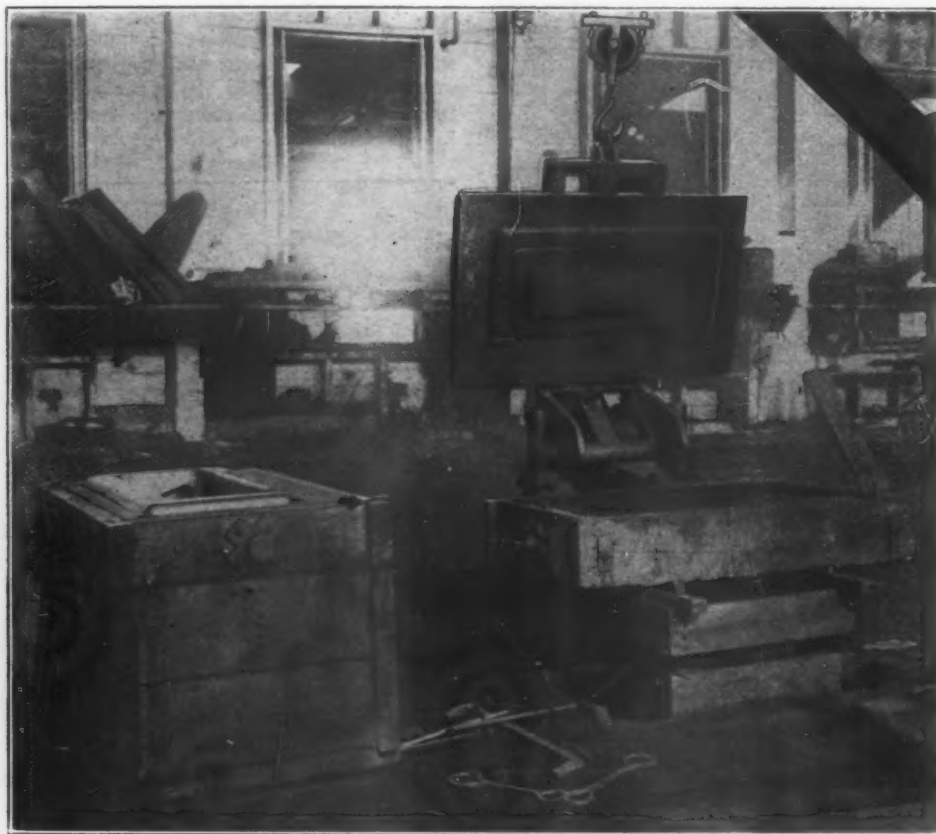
Molding the Cope of the No. 7 Plain Milling Machine Column.
